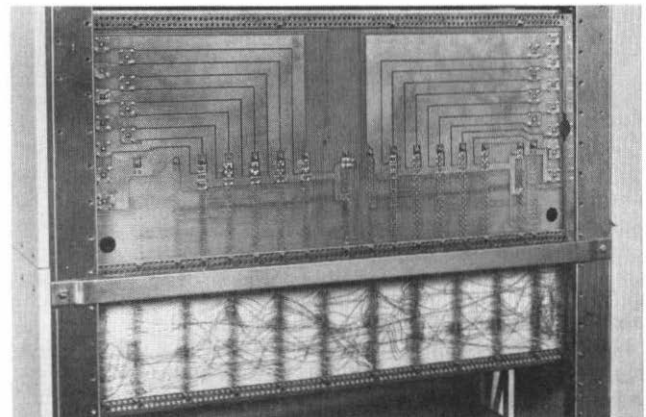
Rear view of rack-mounted shelves (rack covers removed) showing printed-wiring and wire-wrap backplanes
